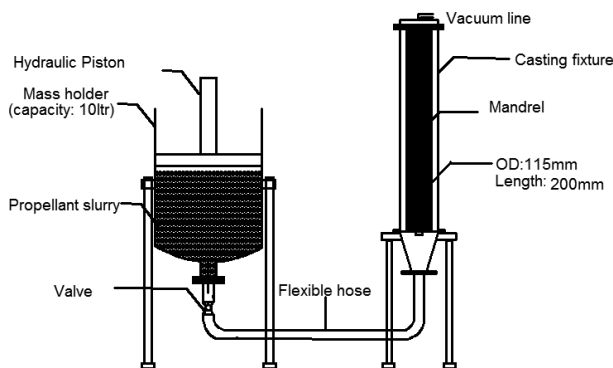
Schematic diagram of pressure casting using a hydraulic piston.
